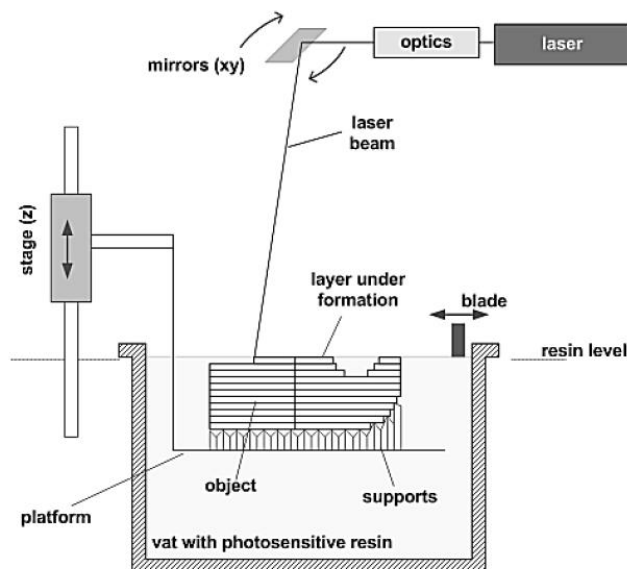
Sketch of the stereolithography printing process.^[25]
